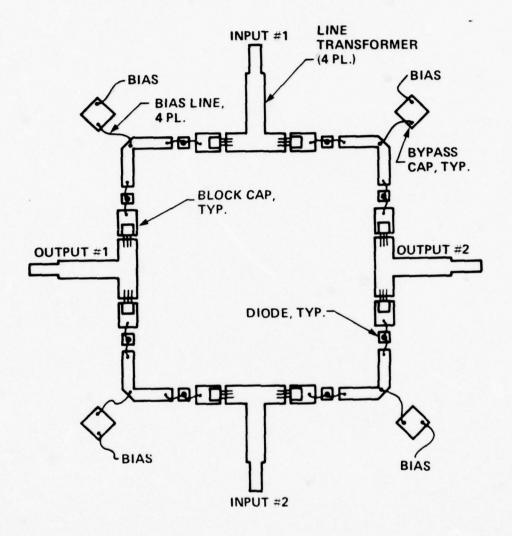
TRANSFER (-1) RF ASSEMBLY
